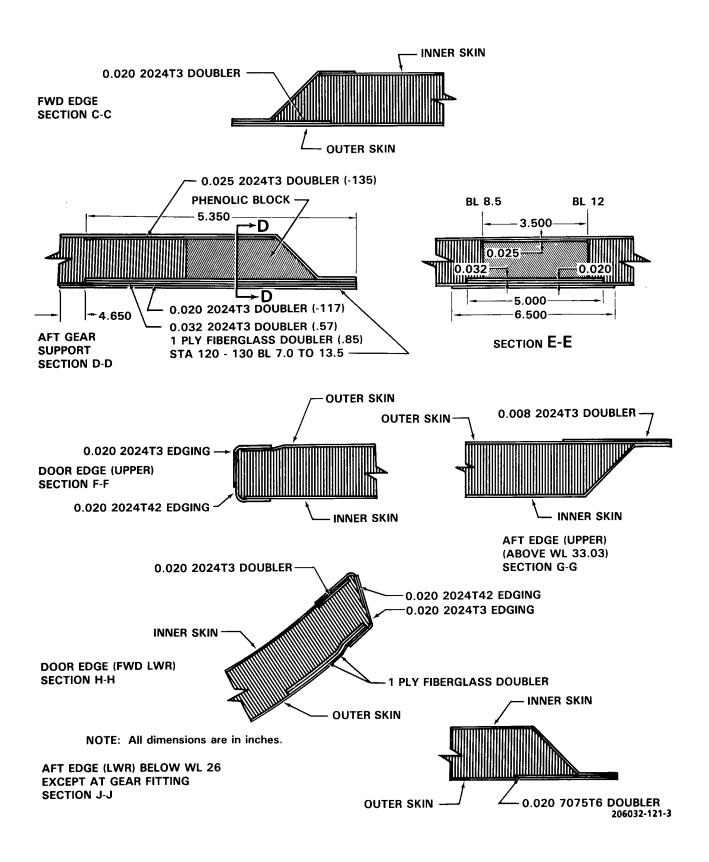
Honeycomb Panel - Aft Lower Cabin Shell Repair (Sheet 3)
